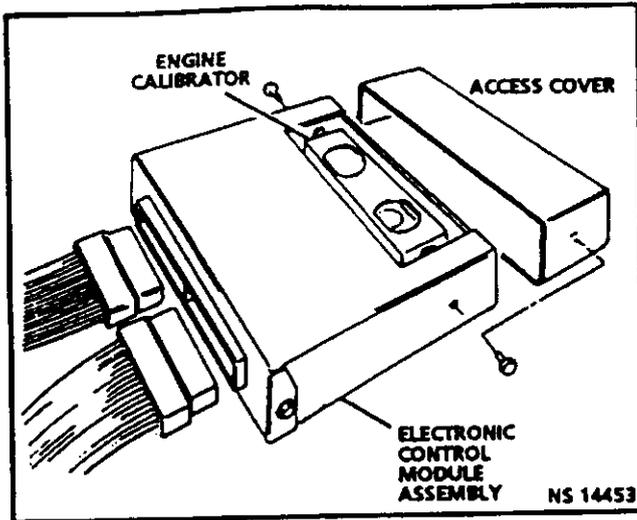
Electronic Control Module Engine Calibrator Access Cover
